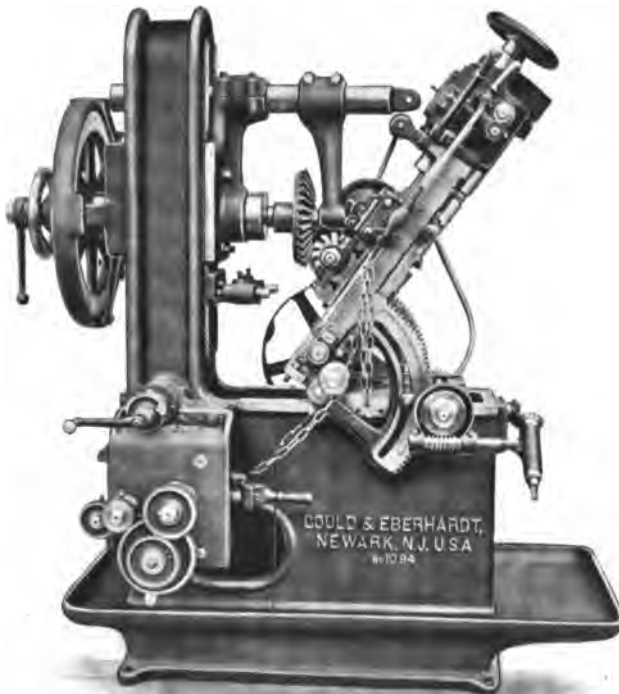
Gould & Eberhardt Automatic Machine Cutting a Bevel Gear
